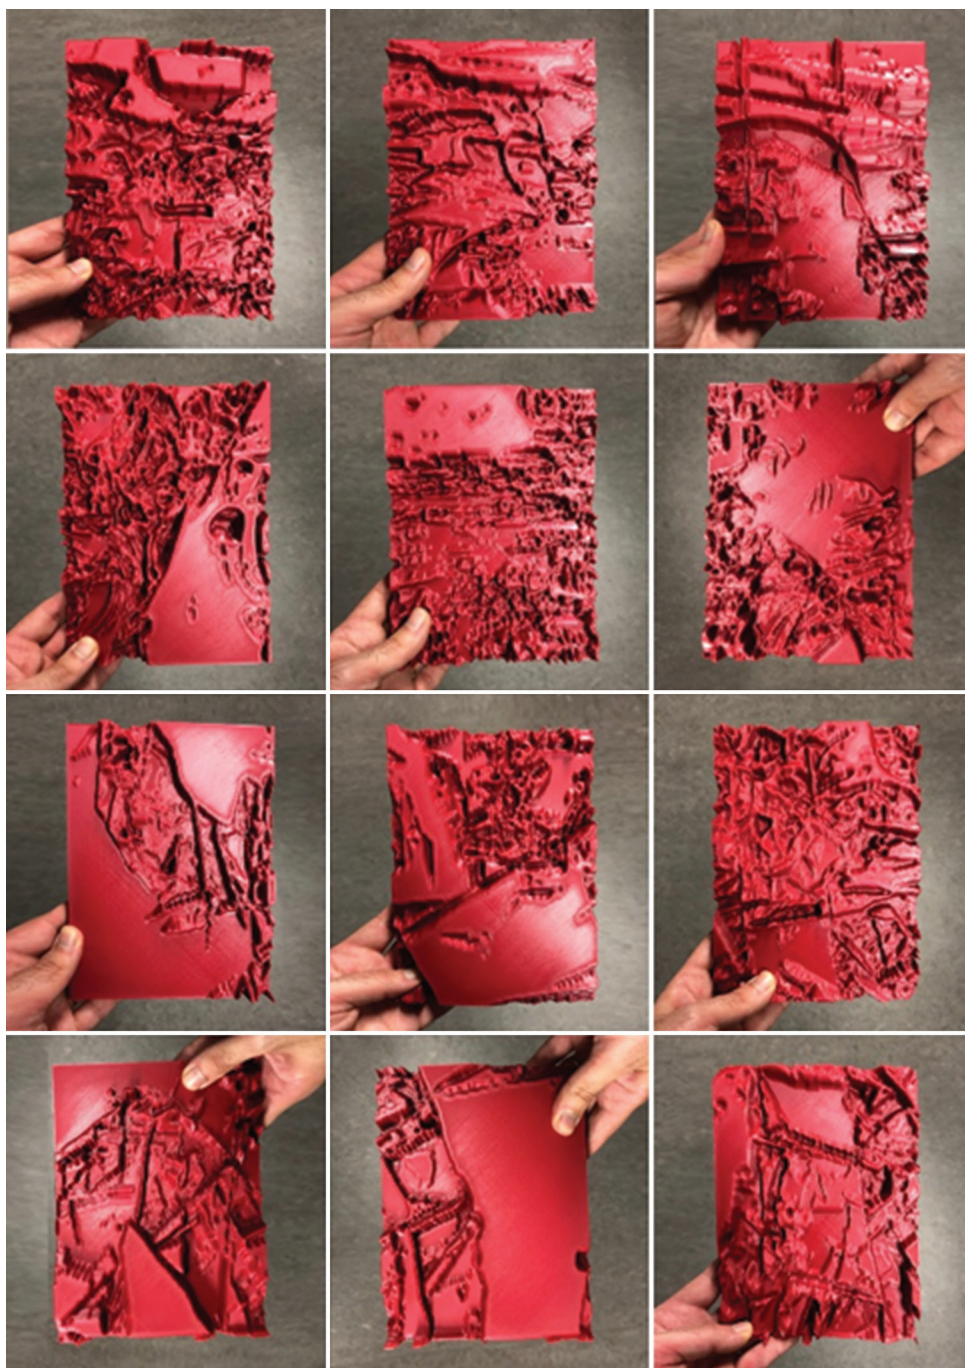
Set of 12 counter-mold parts produced through three-dimensional printing being poured over the assembly (Figure 15).<sup>34</sup>
